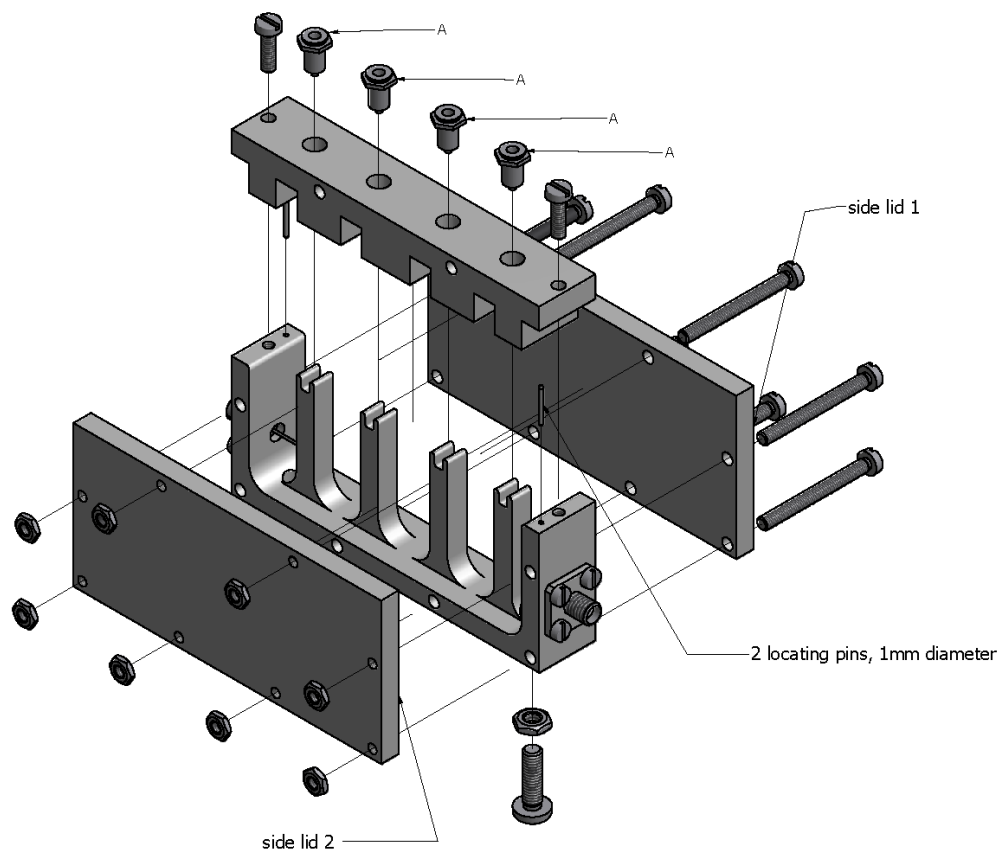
Exploded View of 1.3GHz Comblne Filter - Milling Option
